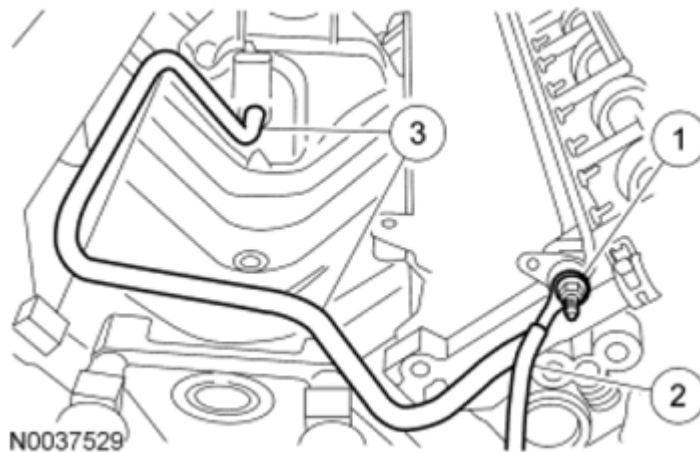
Identifying Retaining Nut, Ground Strap And Coolant Bypass Tube
